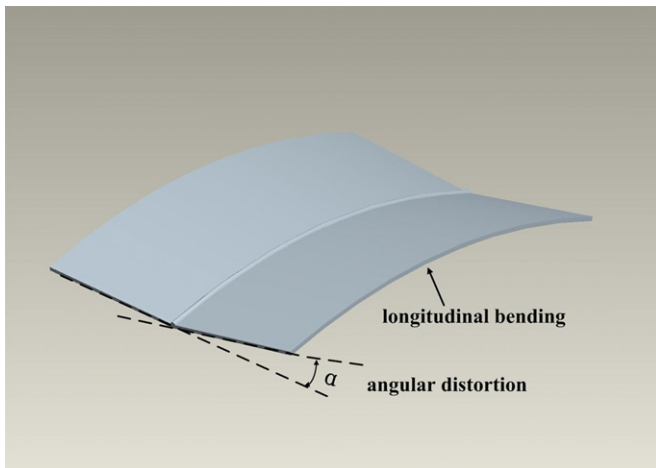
Schematic of out-of-plane deformation caused by welding.
